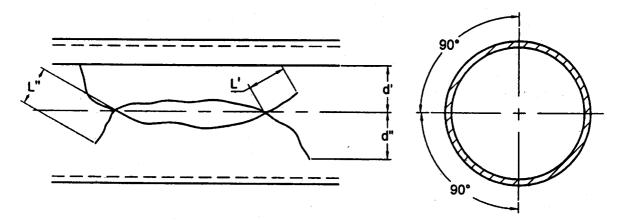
ILLUSTRATION OF BRANCHING AND CIRCUMFERENTIAL DEVELOPMENT OF FRACTURE
